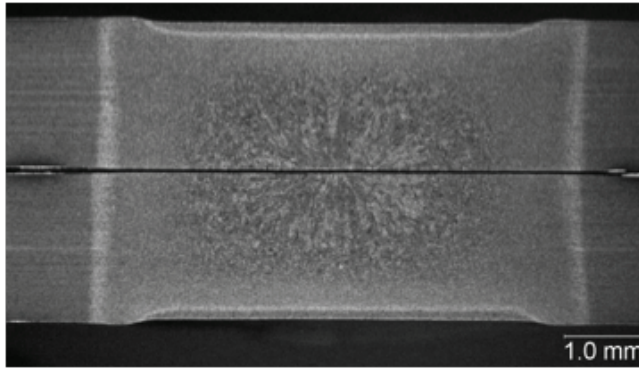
Cross-section view of a stuck weld with very small fused weld nugget.
